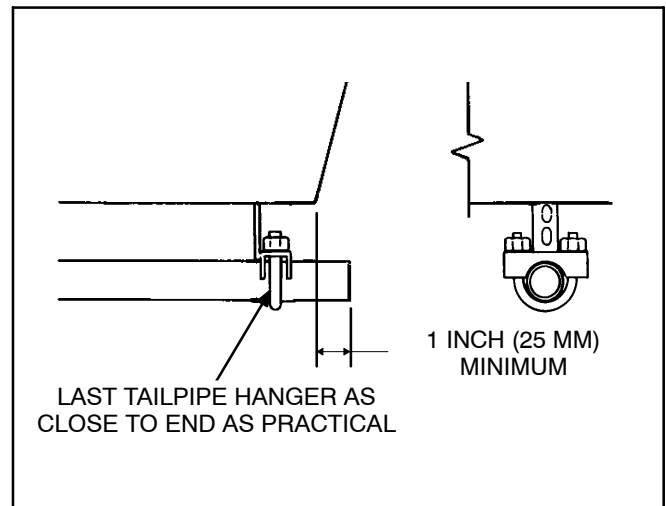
TERMINATING EXHAUST TAILPIPE
